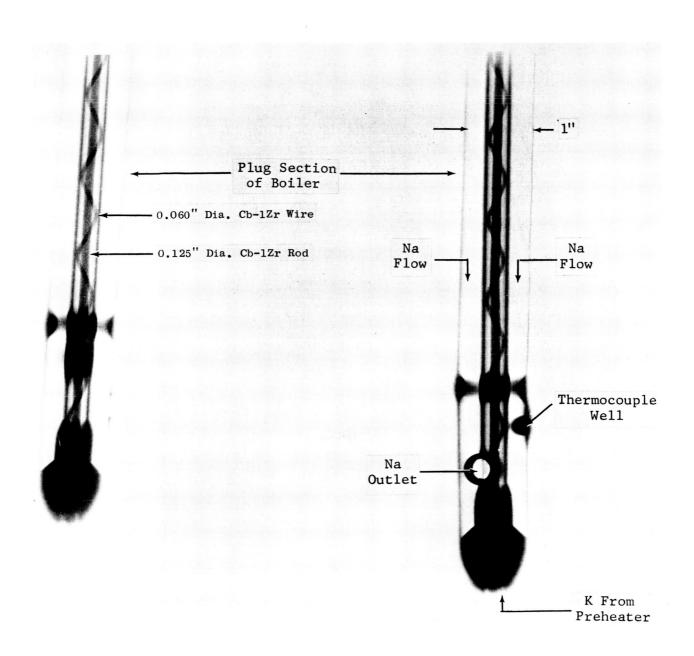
Two Radiographs of the Boiler Inlet Region of the Prototype Corrosion Loop Showing the Plug Configuration.
